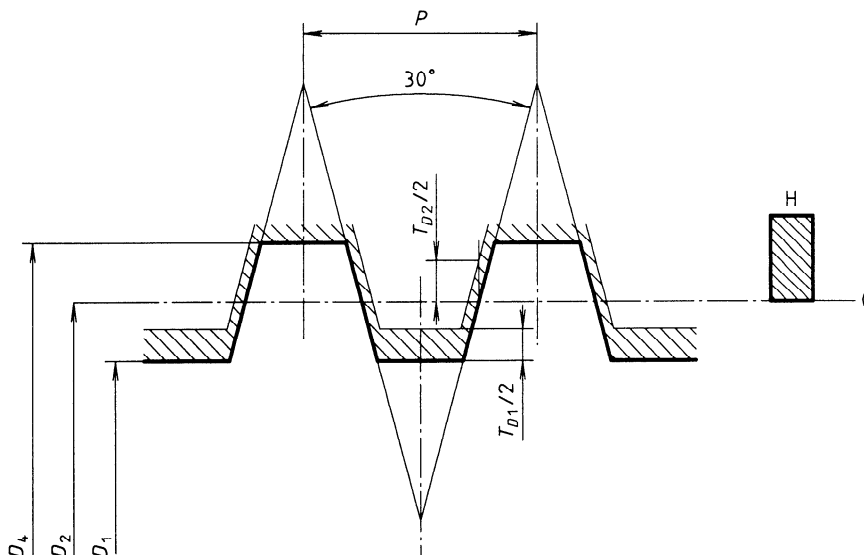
Nut threads with tolerance position H for the pitch diameter
